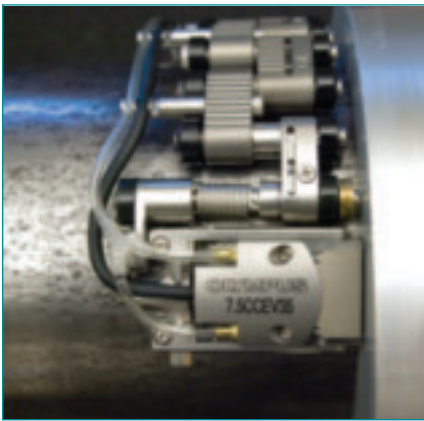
The scanner inspecting pipe-to-component weld in single-sided access.
